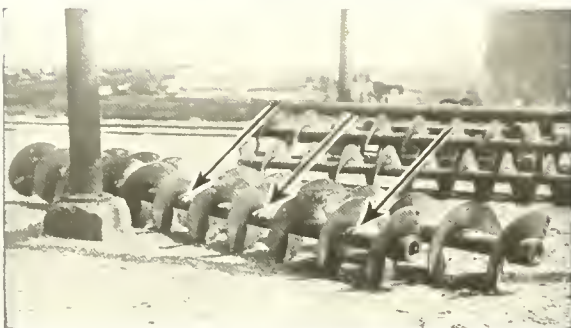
Screw conveyors made by arc welding the spiral steel vanes to a central shaft.
